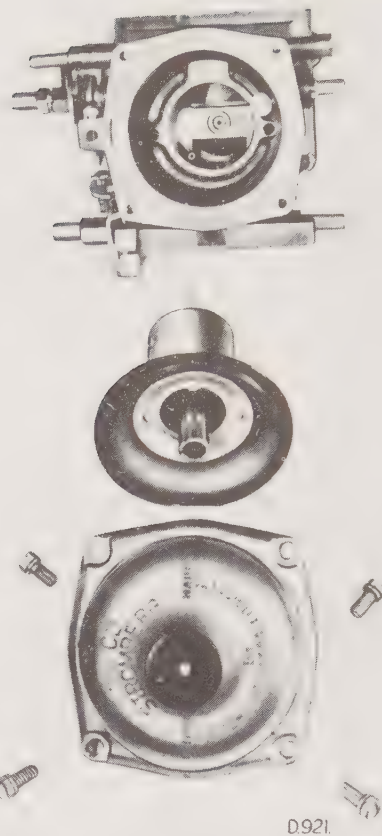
35 Stromberg carburettor with air-piston and diaphragm removed from main body.
